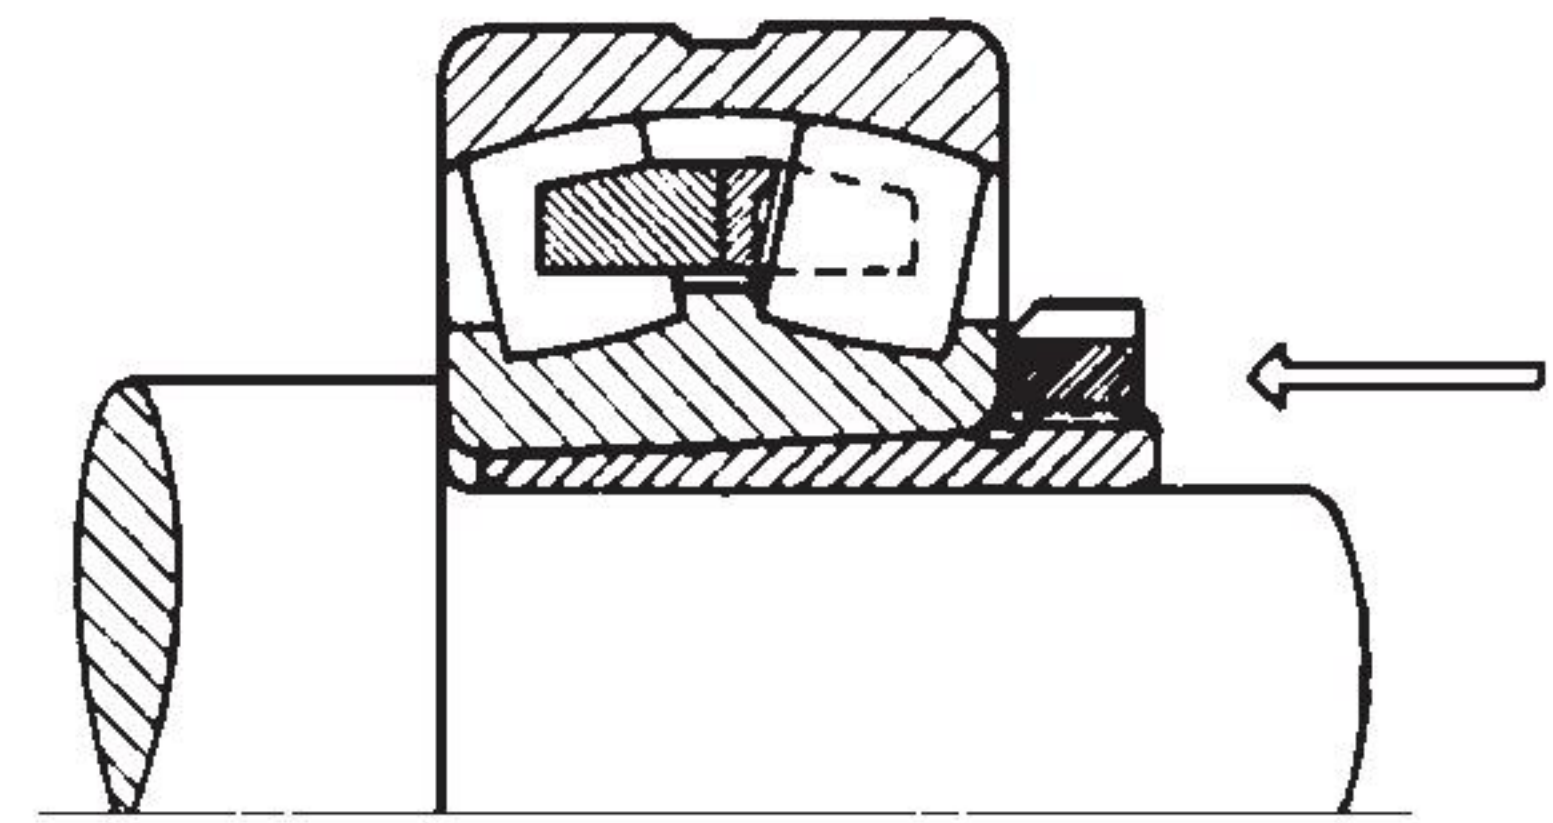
Bearing removal by pulling sleeve from under bearing.
